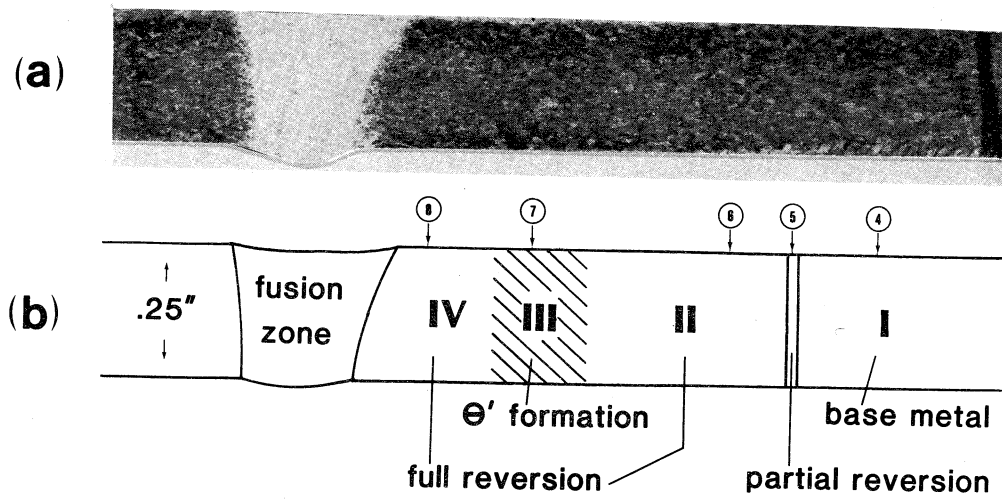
(a) - Cross-section of Plate A after welding. It initially contained GP zones.
